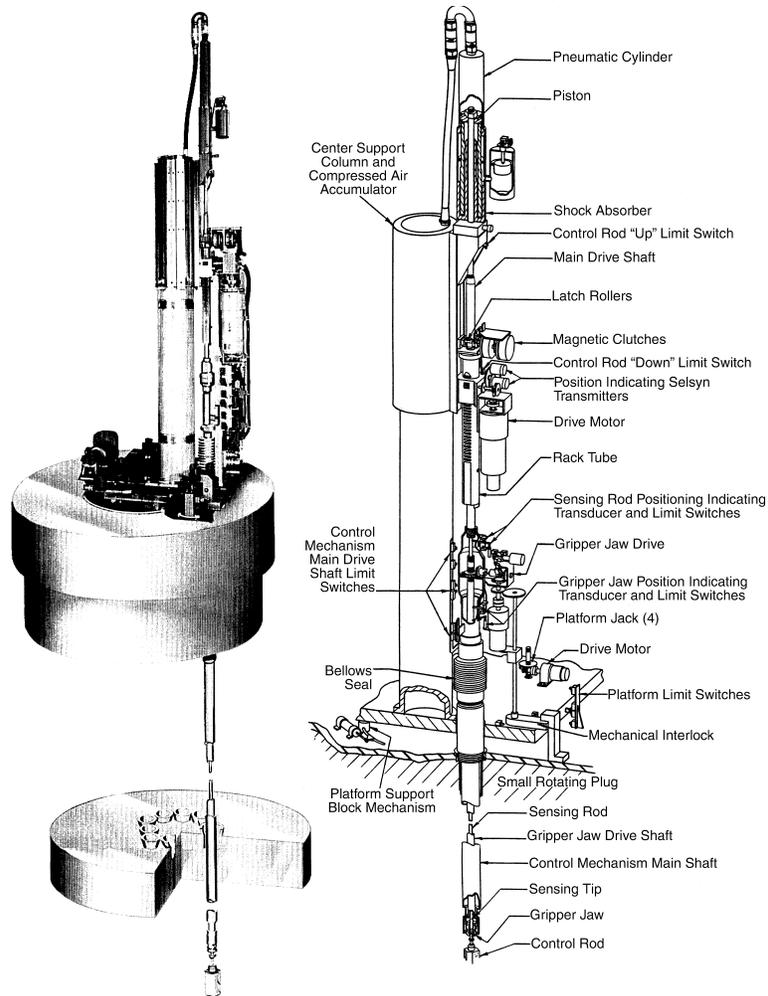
CONTROL ROD DRIVE MECHANISM.
